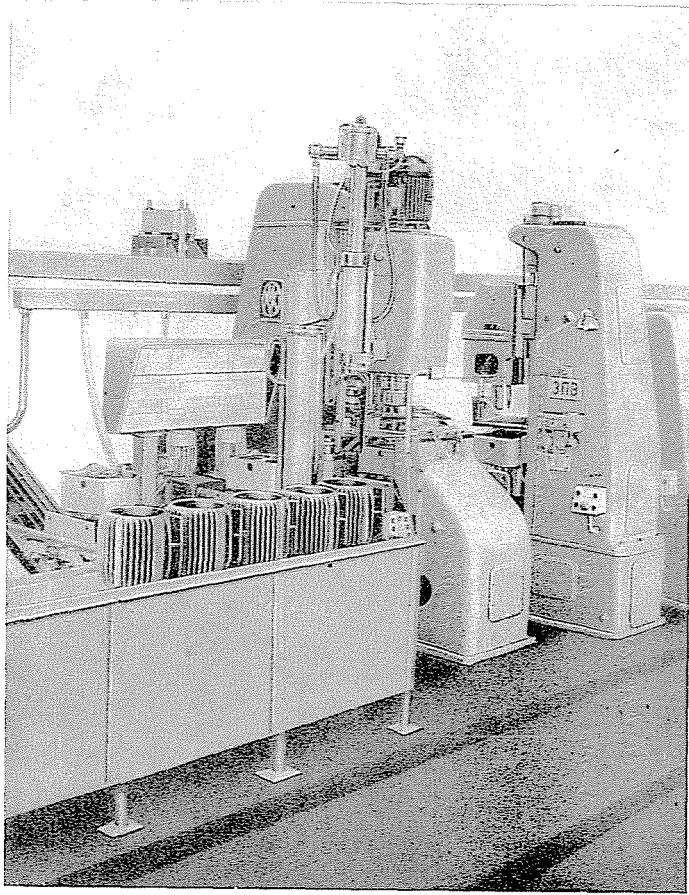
Loading mechanism. Operations and operational data for the first stage of machining on the transfer machine
